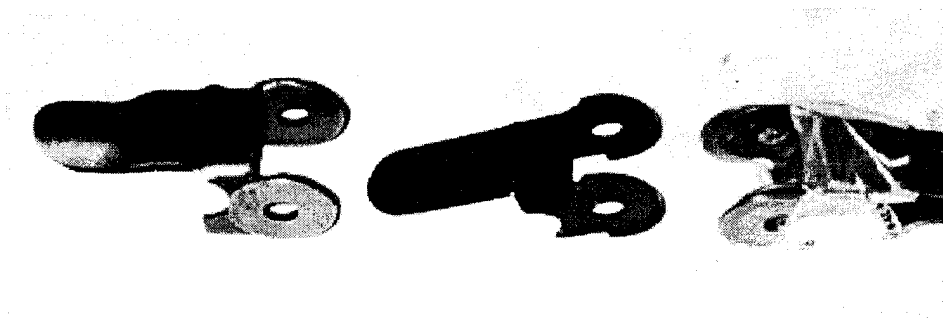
SAMPLE 1 - A NEW, FULLY ASSEMBLED EAR FITTING (FAR LEFT) AND TWO SUBASSEMBLY PARTS.
